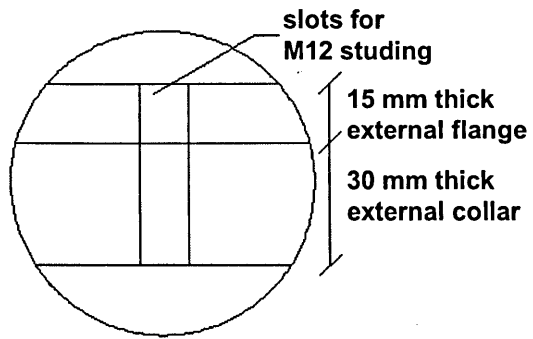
Elevation view of slot clamping bolt type 2 (B) from Section BB (all dimensions in mm, not to scale)
